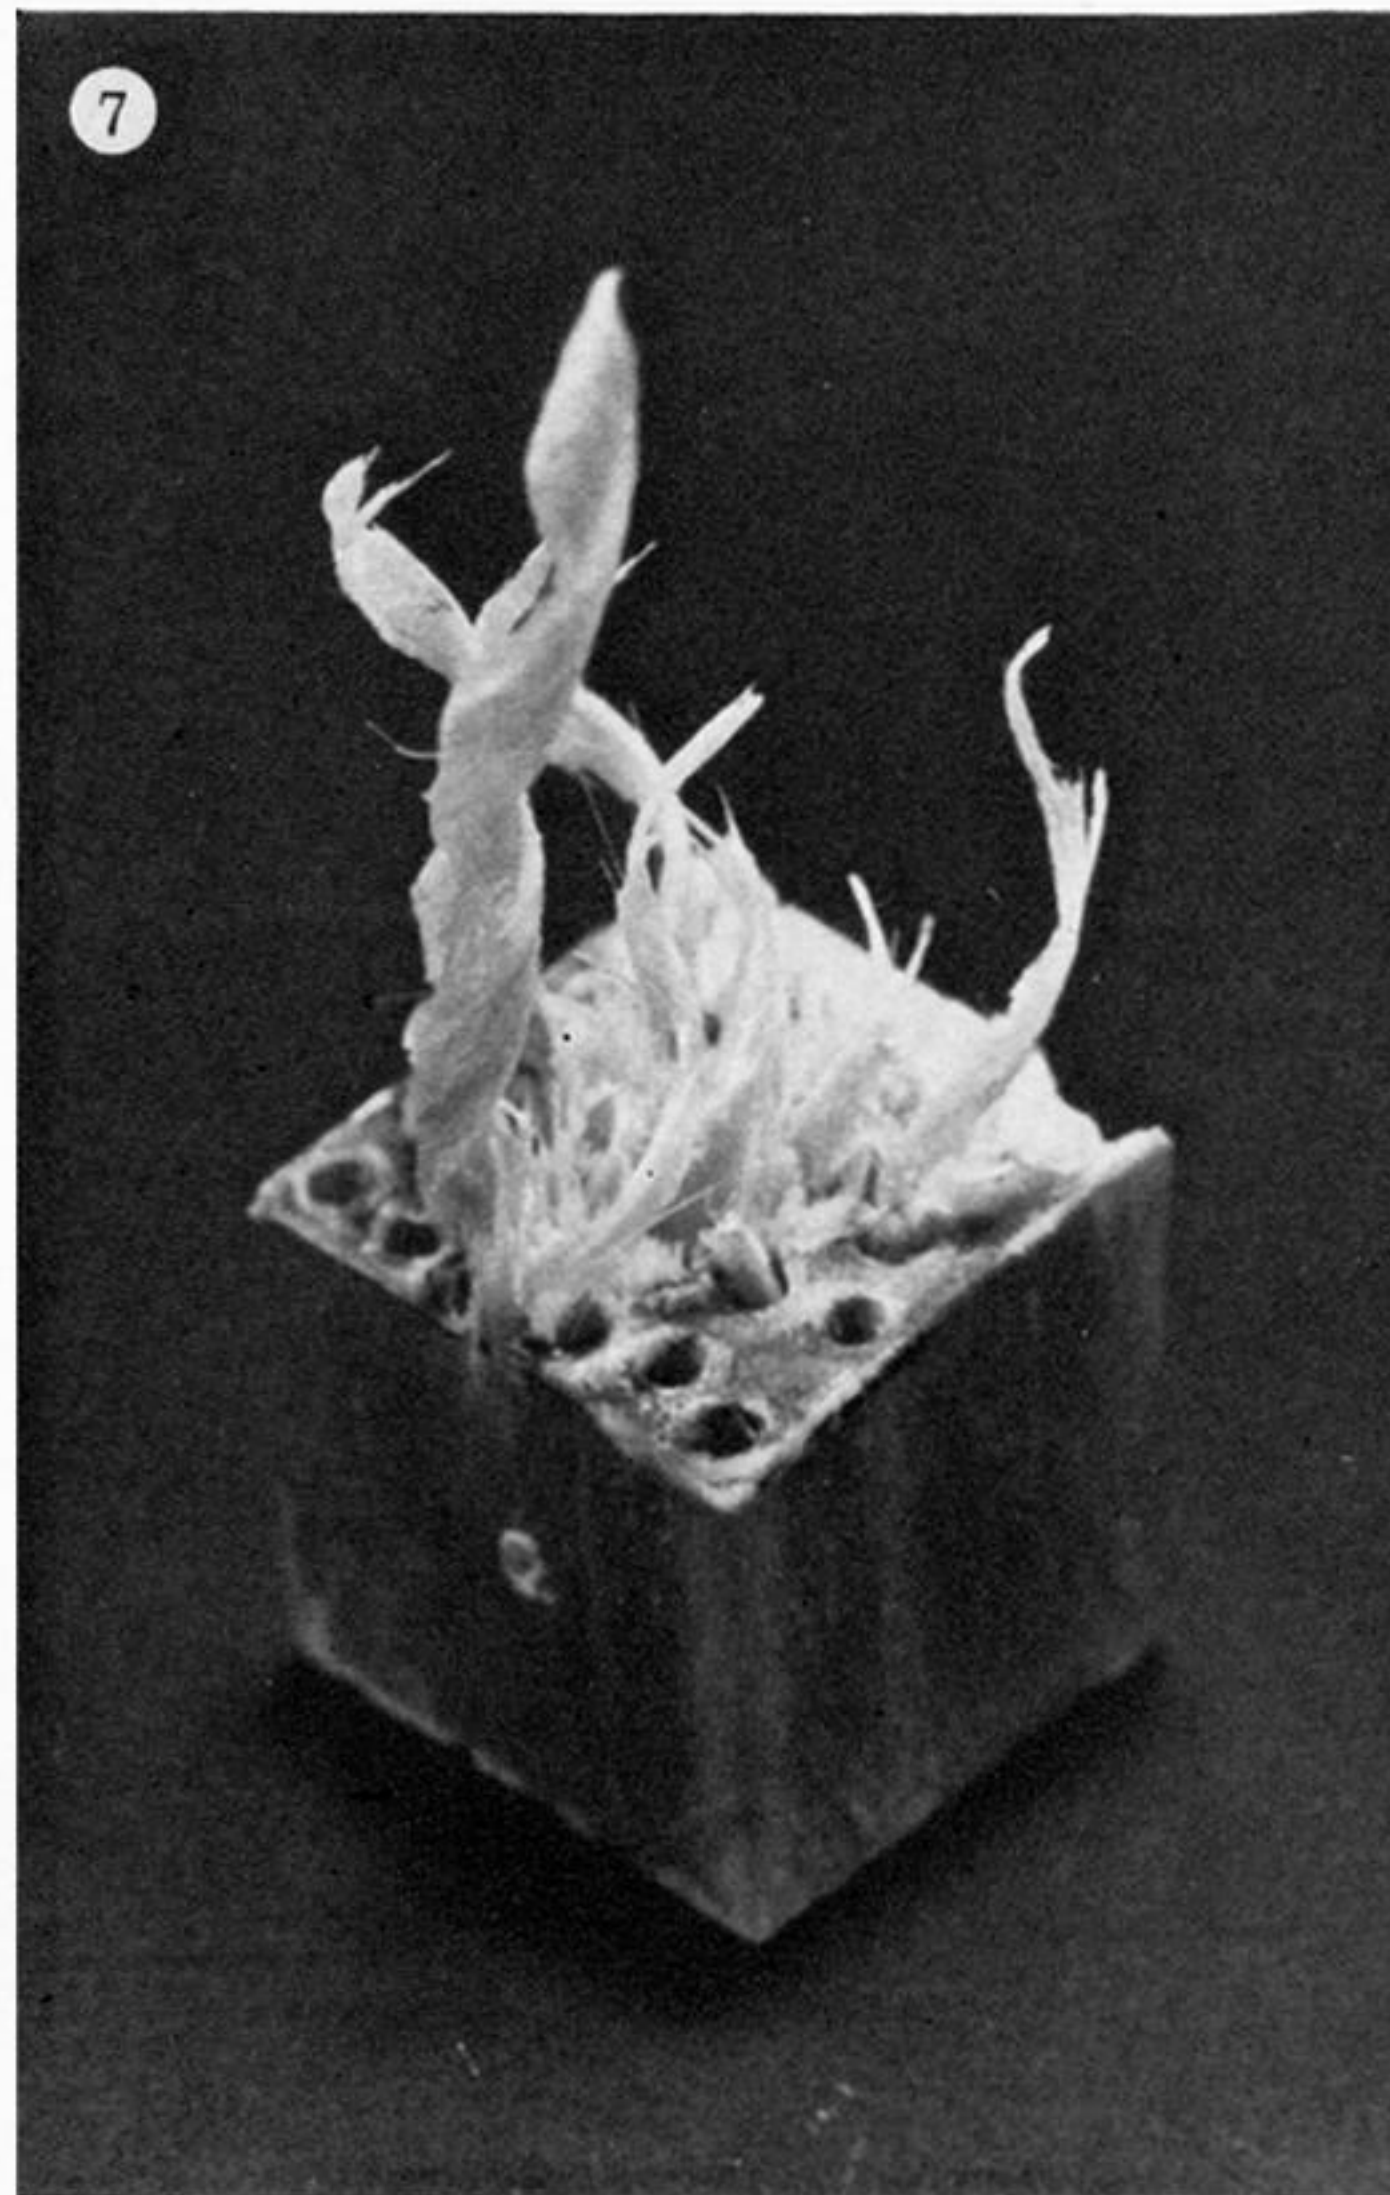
Fracture morphology for composite reinforced with macrofibres of winding angle 25° . Bending fracture (magn. $\times 4$).
